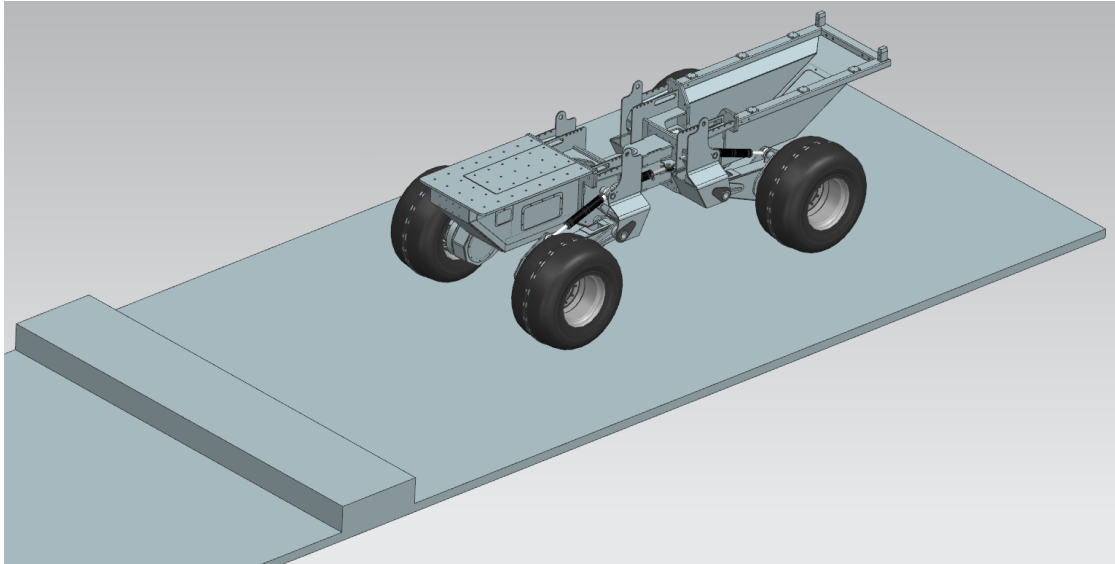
The assembly of the TFP used to test the VR system, taken in Siemens NX.
